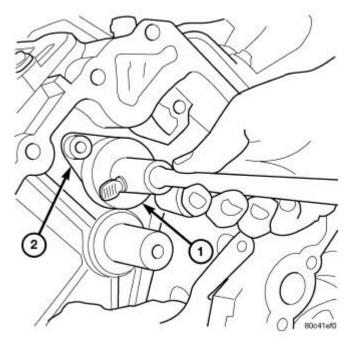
Counterbalance Shaft Removal/Installation Tool Courtesy of CHRYSLER LLC
